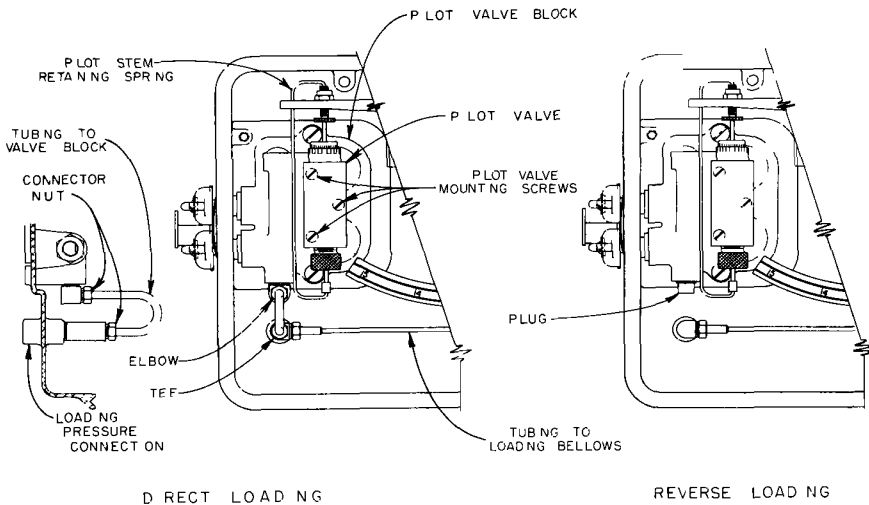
Positioner Internal Tubing for Direct and Reverse Loading
